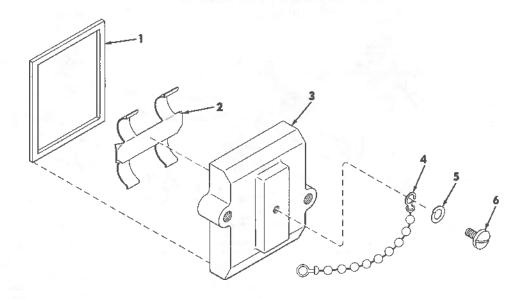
COVER. PLATE ACCESS SUBASSEMBLY /9006419/-EXPLODED VIEW /SEE FIGURE 148 FOR NEXT HIGHER ASSEMBLY/
